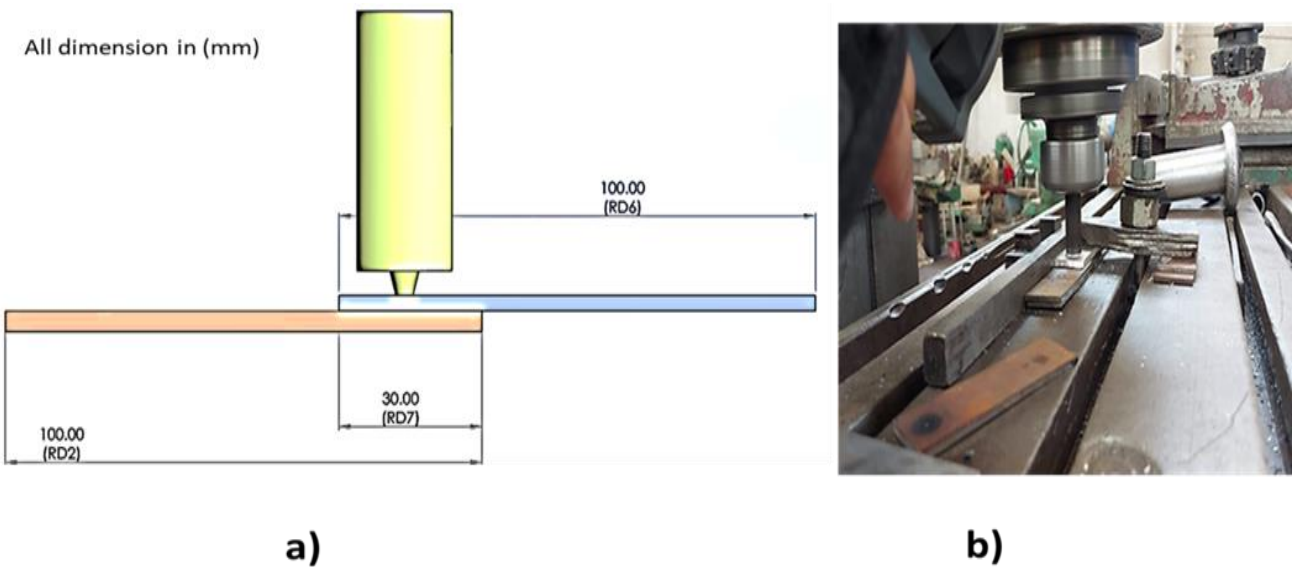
a) Schematic design of the plate layouts, b) Welding setting
